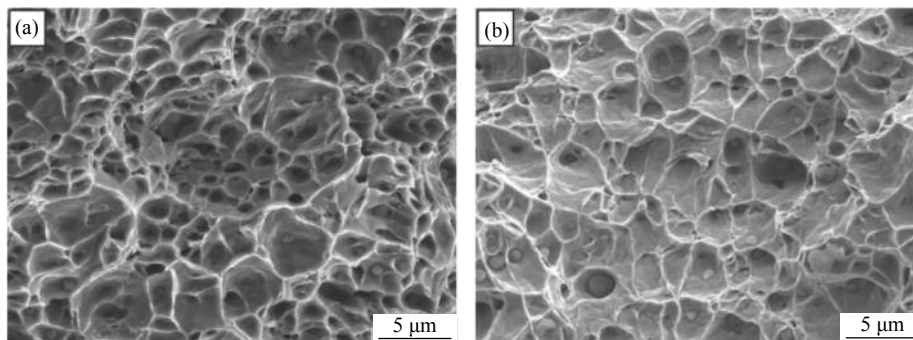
Fracture photos of the forming part: (a) tensile fracture; (b) impact toughness fracture.
